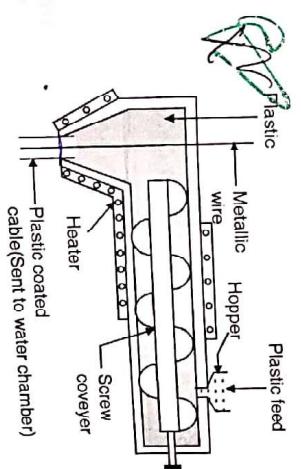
Moulding of insulated electric cable by vertical extrusion moulding
